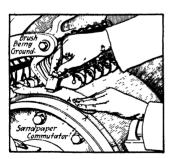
Grinding brushes with sandpaper. (Westinghouse Electric & Mfg. Co. Inst. Bk. No. 5107-A).
